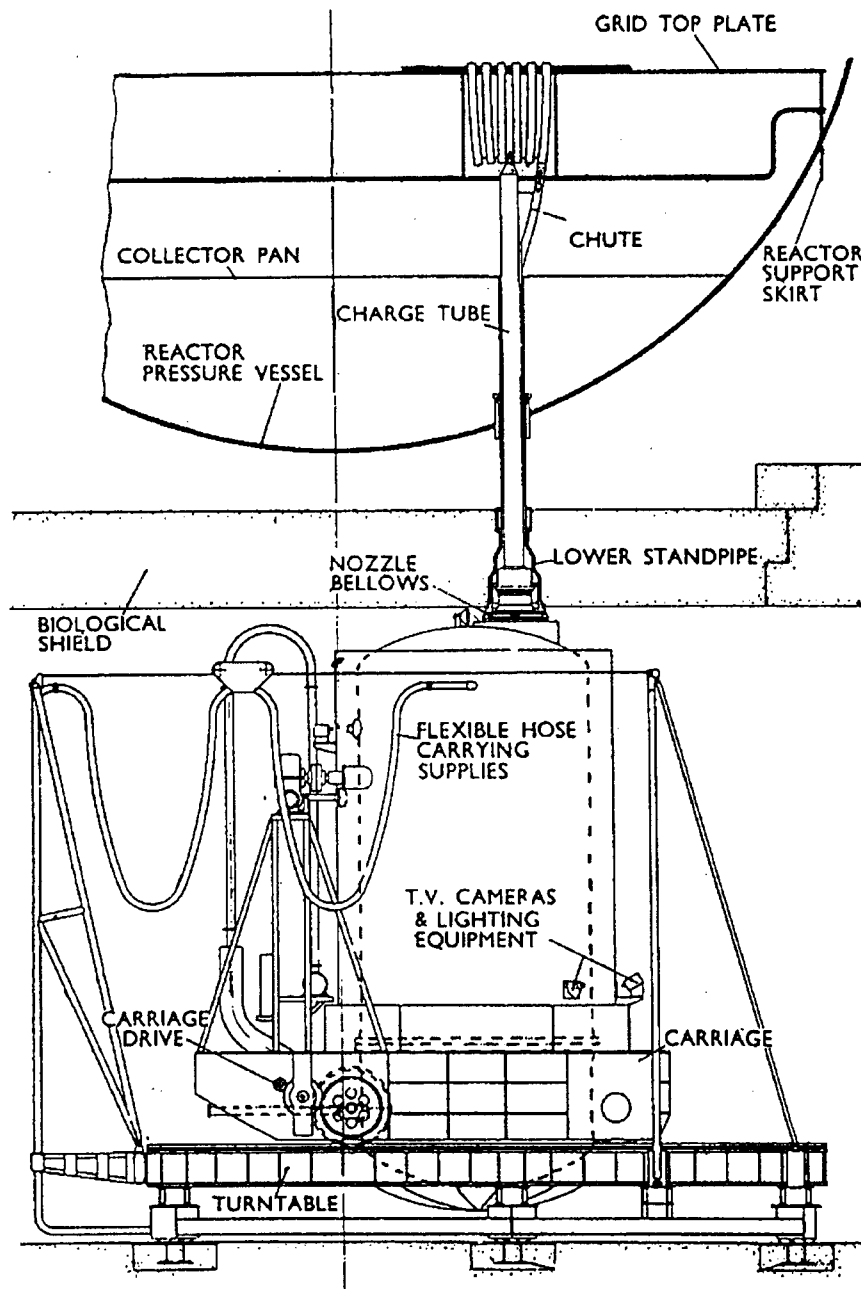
Arrangement of bottom-charging machine for Hunterston.
